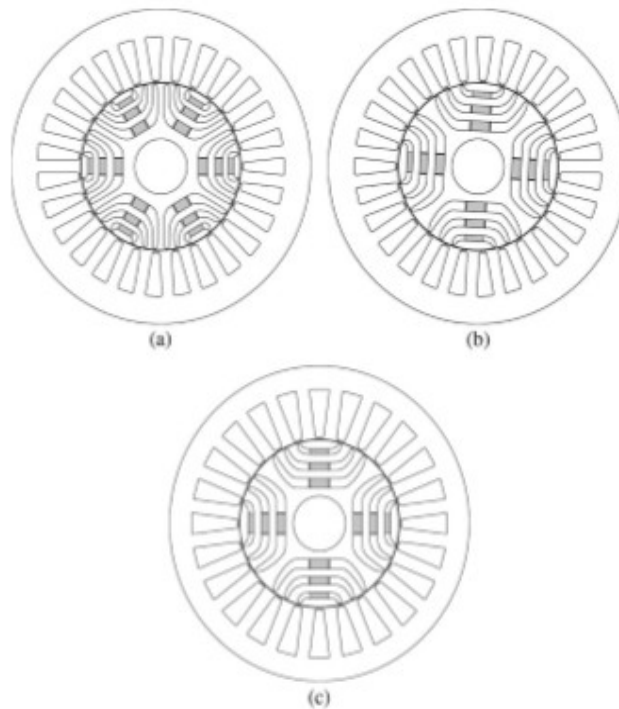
Stator and rotor geometries of the IPM machines. (a) Twenty-seven-slot six-pole machine. (b) Twenty-seven-slot four-pole machine. (c) Twenty-four-slot four-pole machine.
